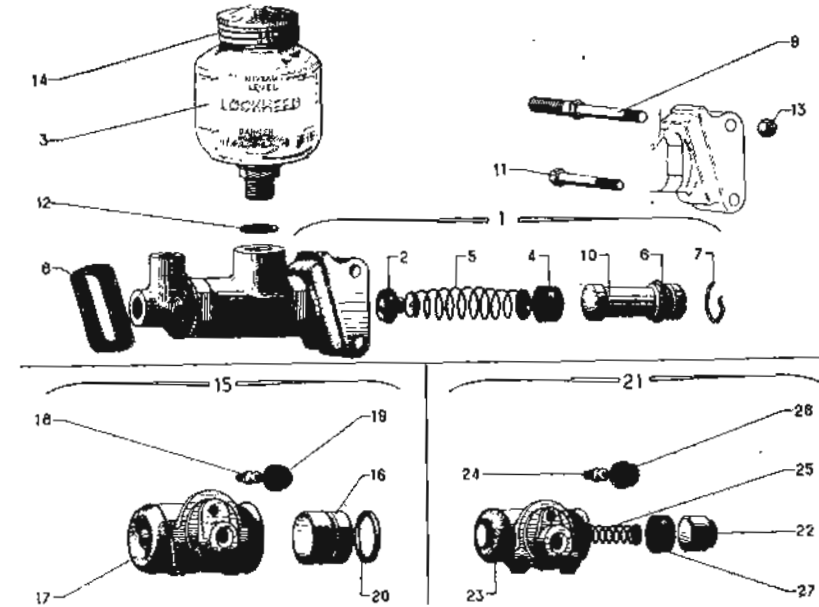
MASTER CYLINDER AND BRAKE CYLINDERS.
